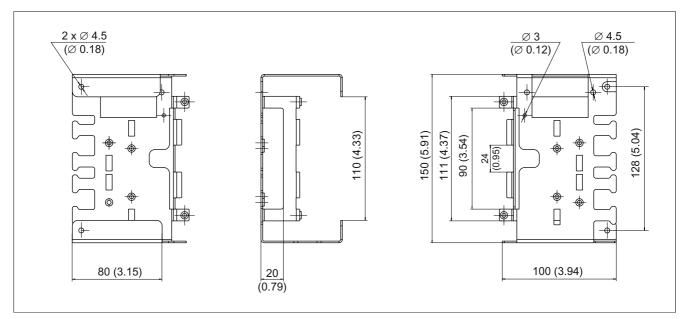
Dimension drawing of Screening Kit, frame size FSB, all data in mm and (inches)
